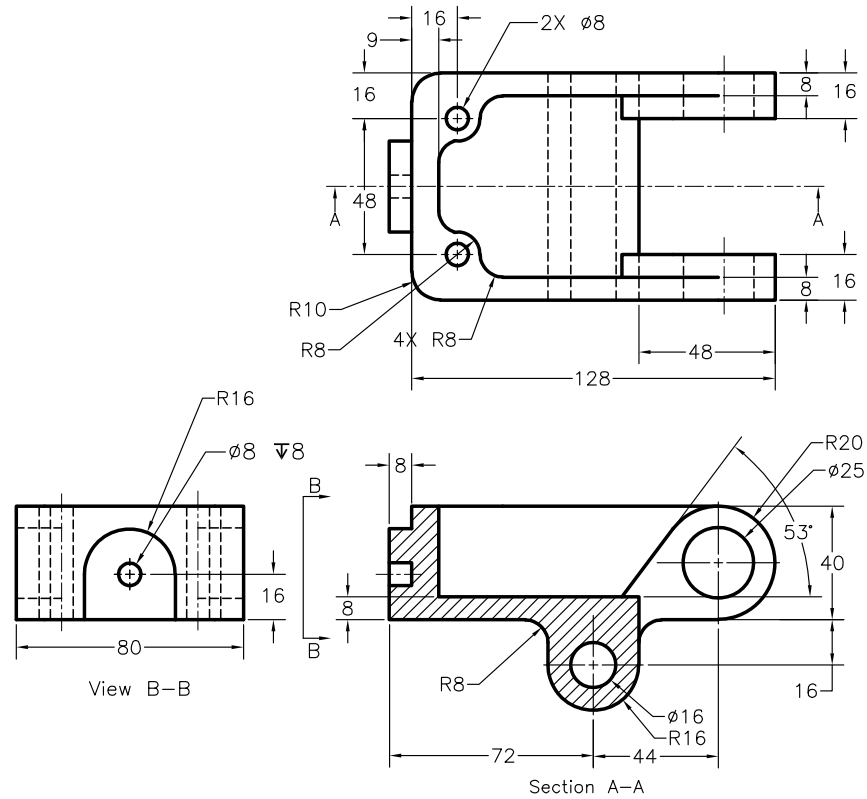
Views and dimensions of the drawing for Problem-Solving Exercise 5
